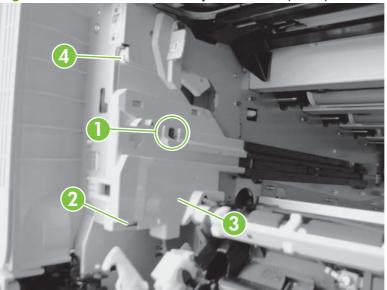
Remove the secondary transfer unit (4 of 9)
